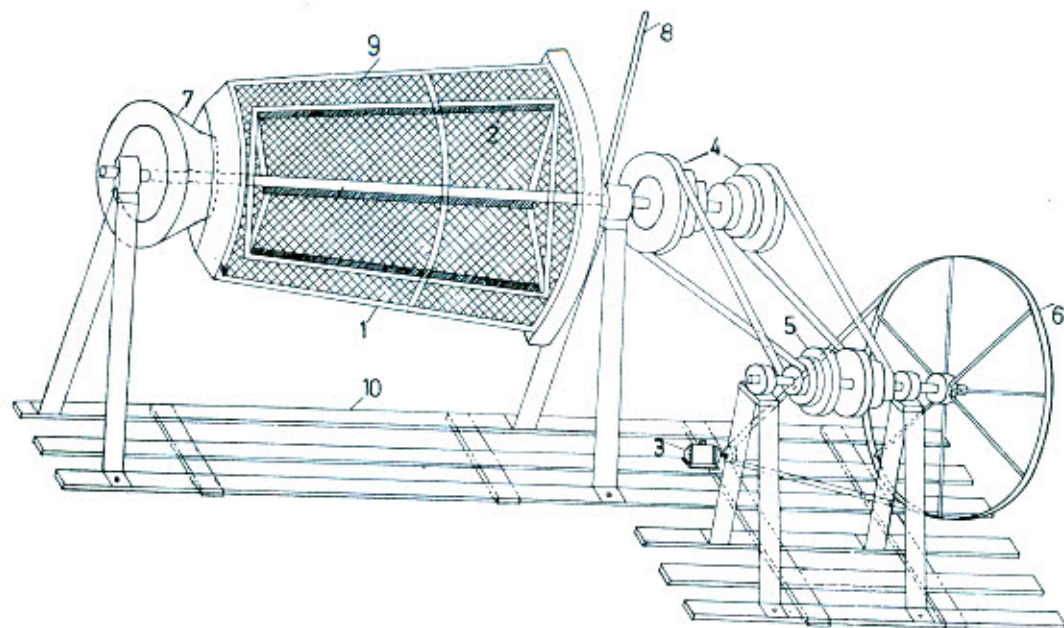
Mechanical fish cleaner [(1) Wire mesh drum (charging end diam. 615 mm, discharge end diam. 690 mm); (2) coir brushes (3 Nos) (900 × 50 × 50 mm); (3) electric motor (1 hp); (4), (5), (6), step pulley, variable speed and direction drive system; (7) conical charging door; (8) lever operated discharging door; (9) G.I. wire mesh (3 mm sq); (10) wooden base. Capacity of the cleaner, 40-50 kg/hr]
